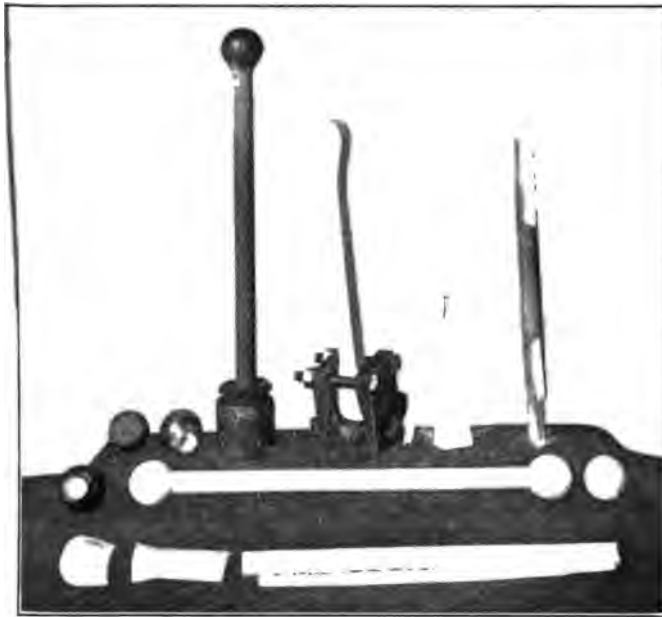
TEST PIECES, SHOWING GRIPS AND TYPICAL FRACTURES
